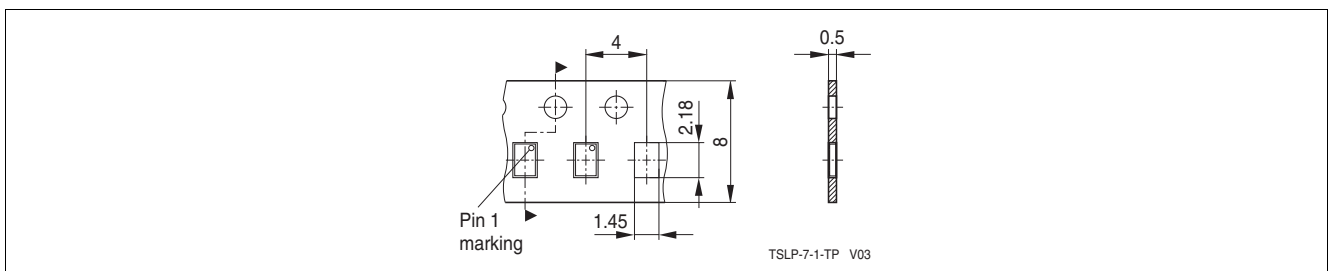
Tape & Reel Dimensions (Ø reel 180, pieces/reel 7500)
